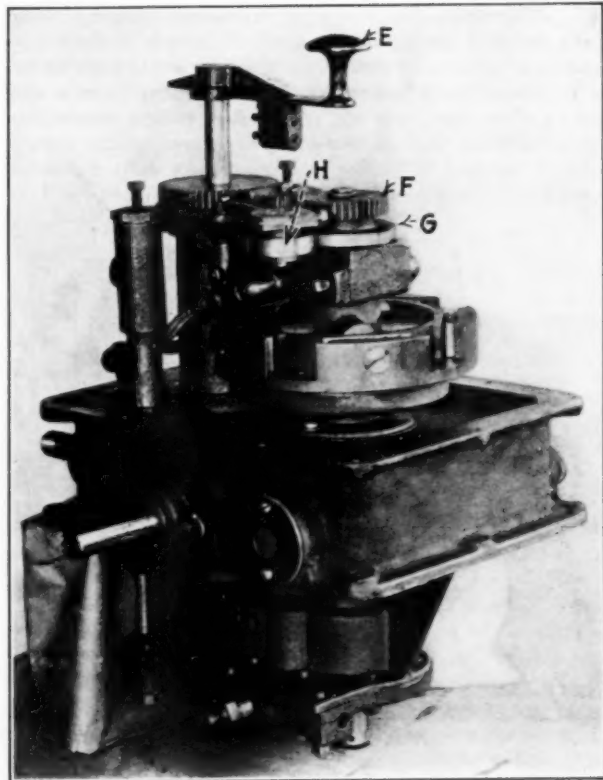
PUMP REMOVED FROM ITS OILPOT AND WITH COVER OFF
